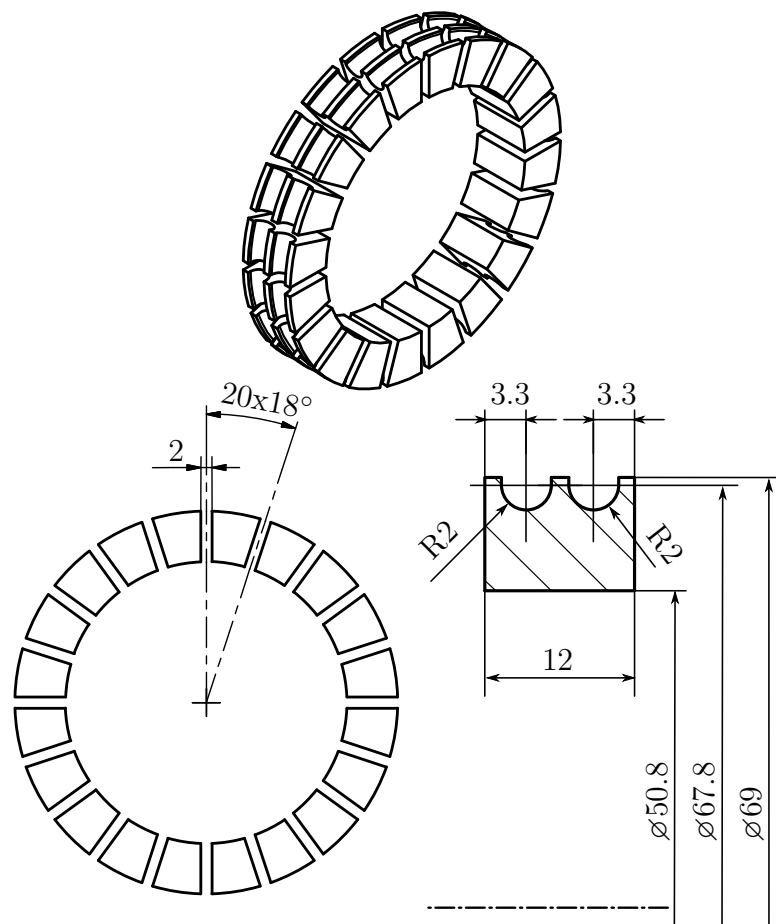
The 20 piece ring sketched in 3D and its drawing, including a cross section of a ring segment.
